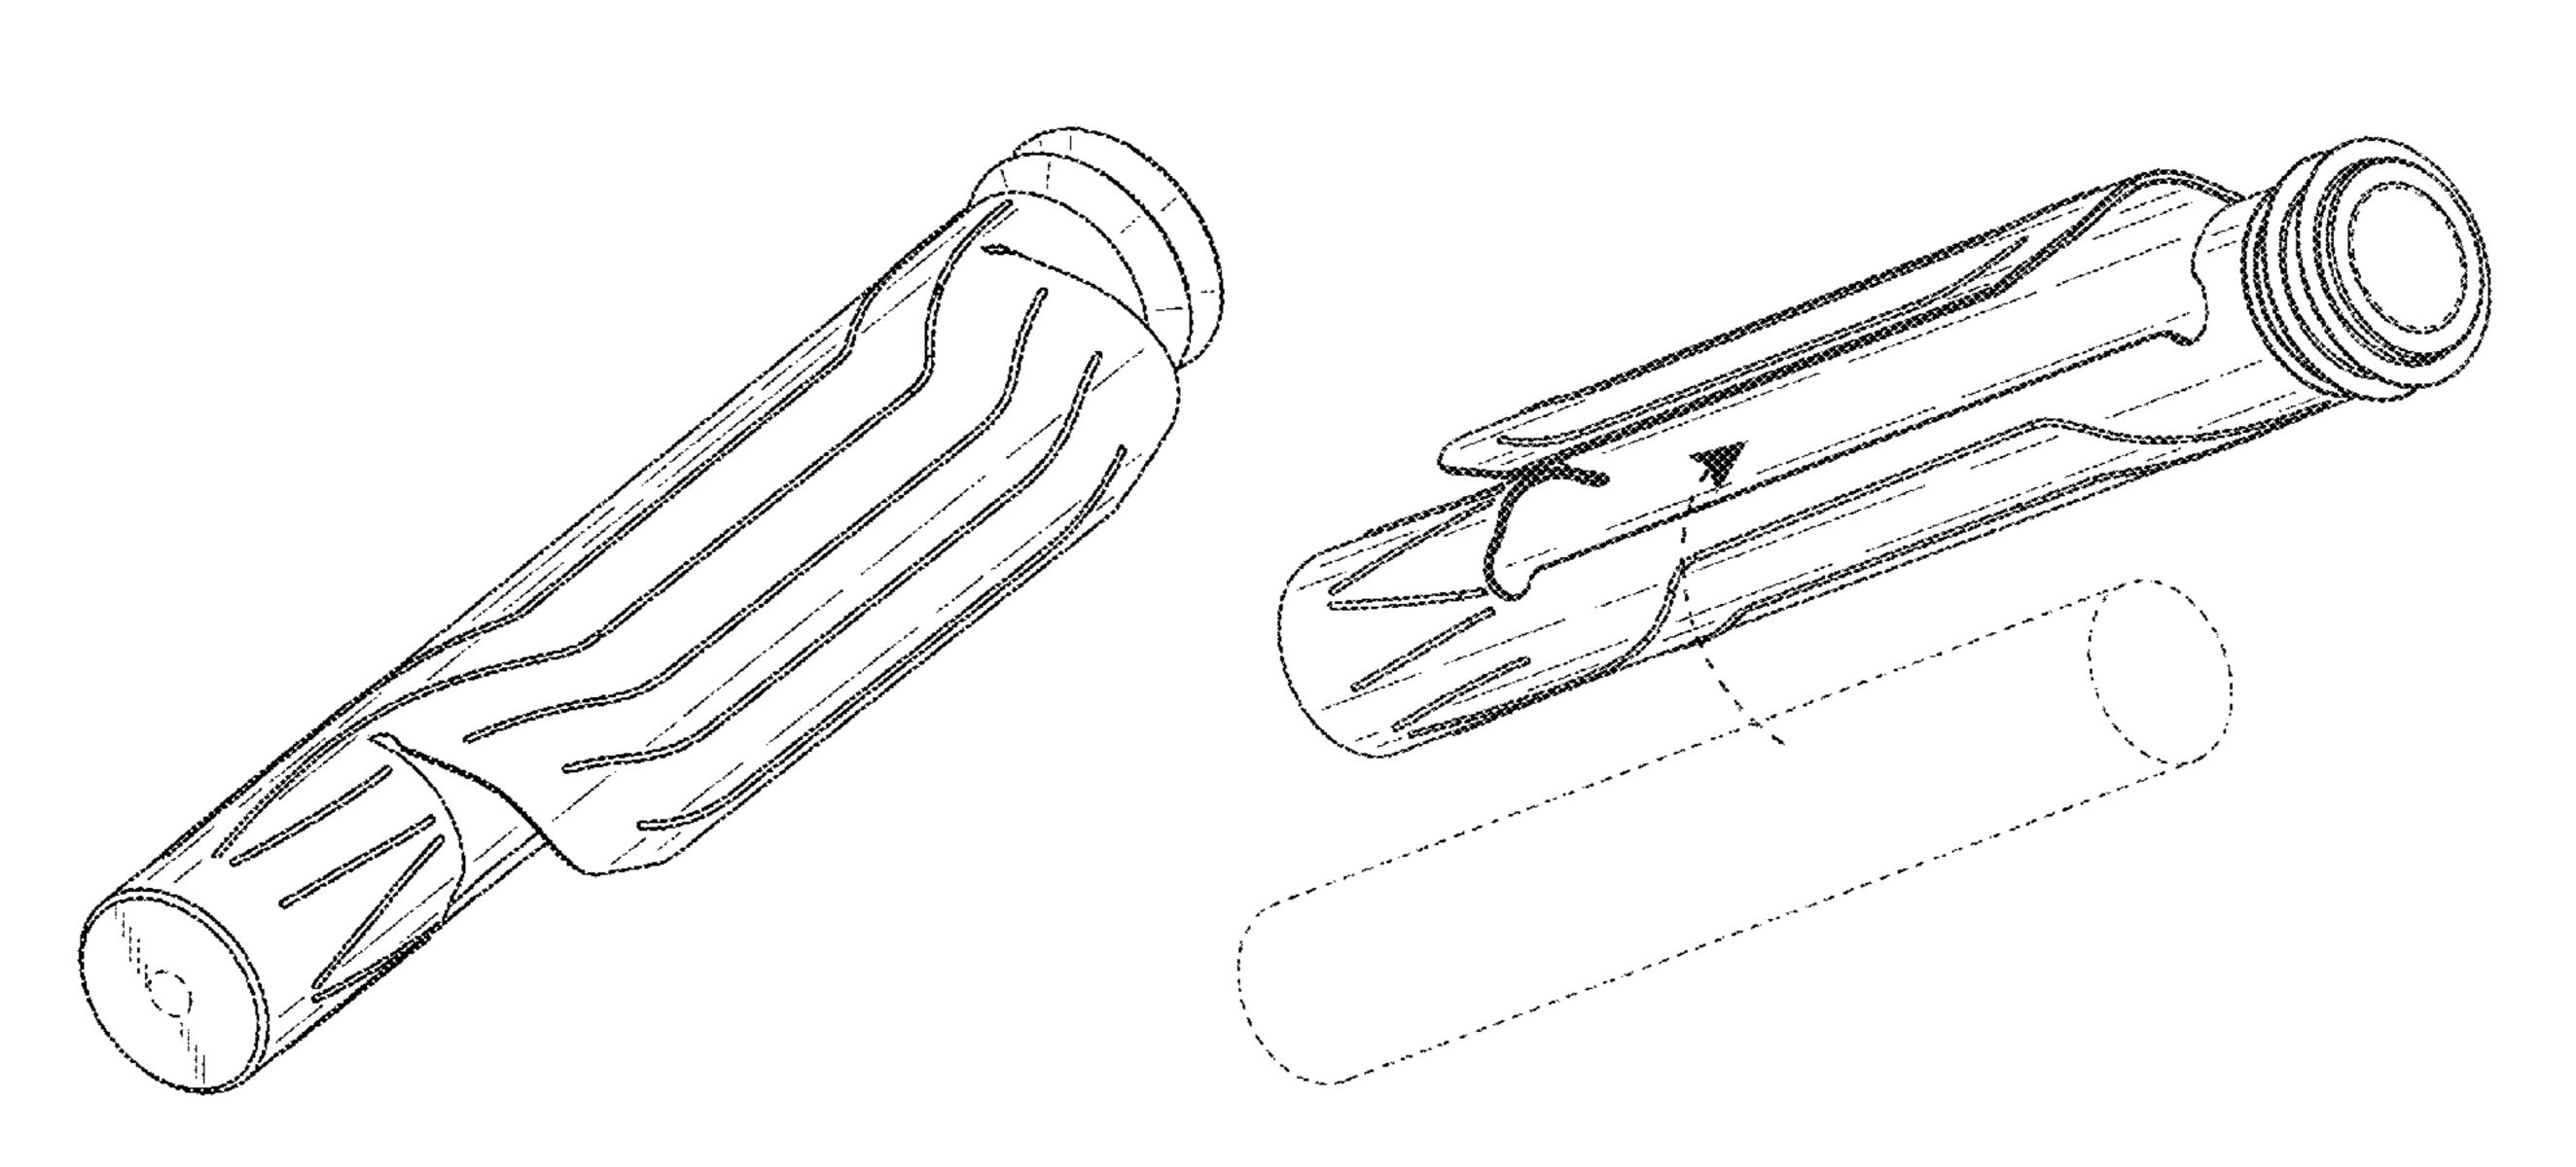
is a front and left-side top perspective view of the tool sleeve with the flap of the tool sleeve in a closed position;
